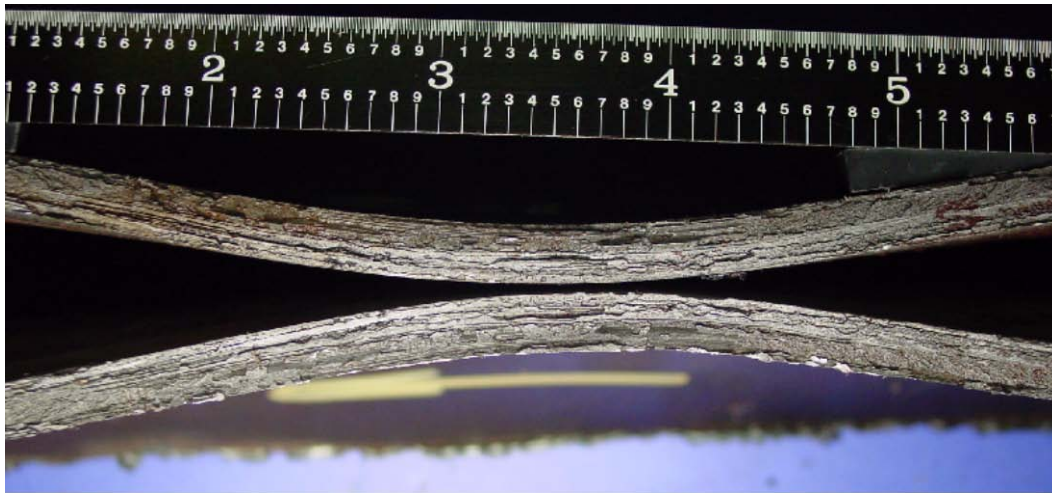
Fracture Surface of a Woody Fracture – Case Number W2
